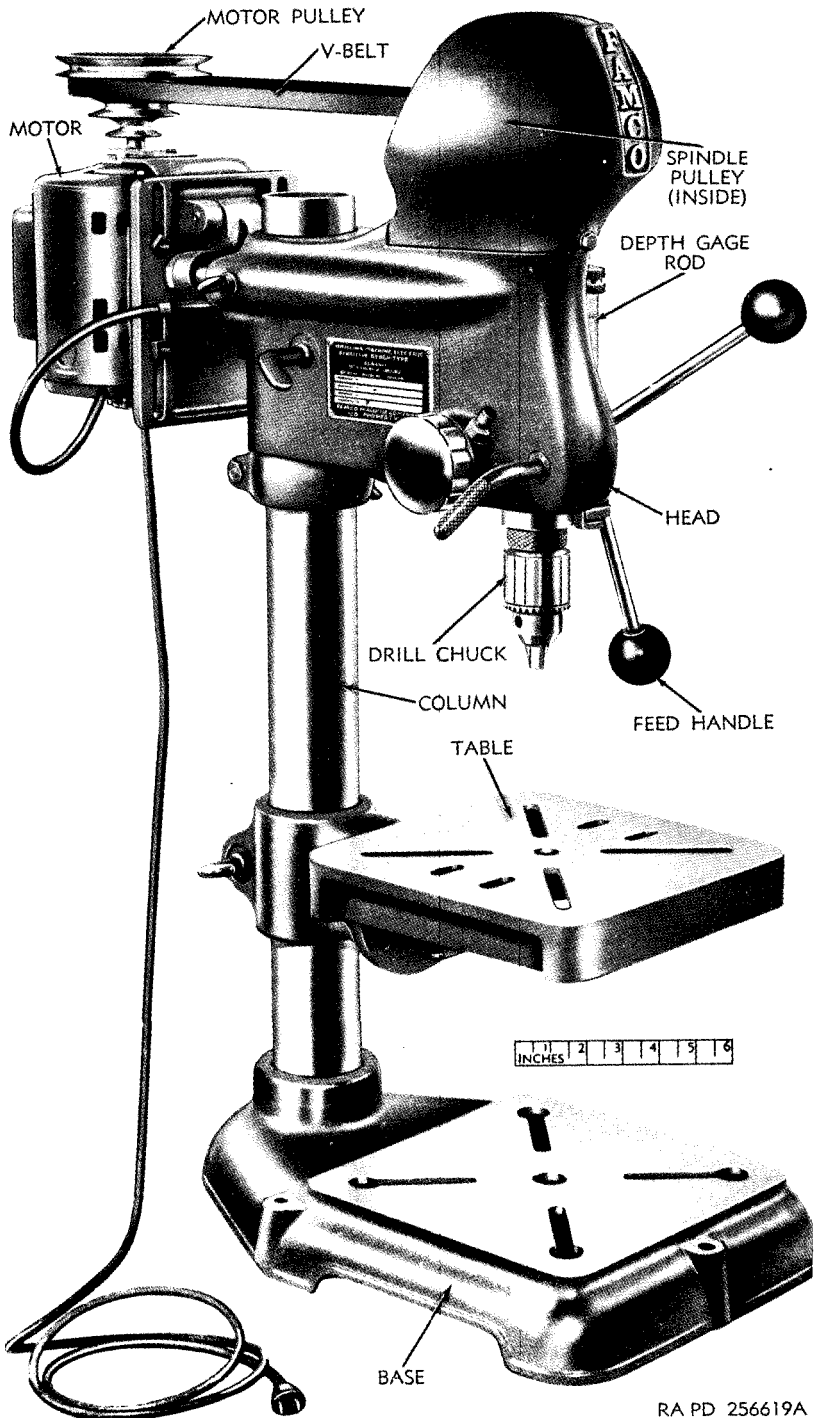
Bench-mounted sensitive-type upright drilling machines.
